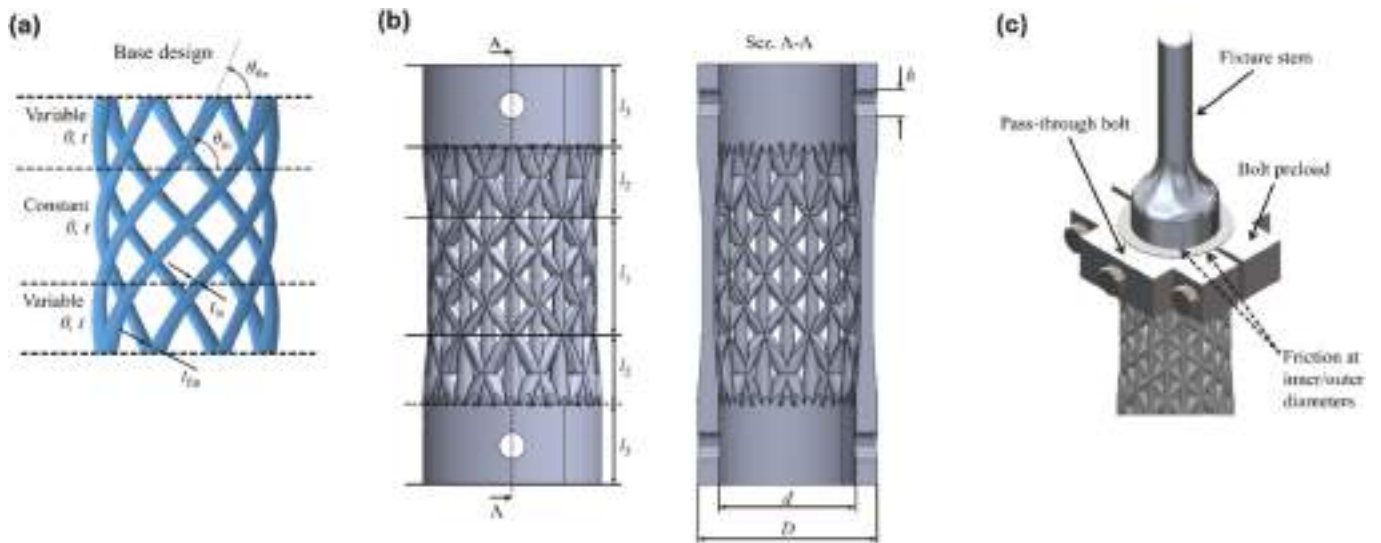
a) design of the lattice specimen gauge and transitional zones. b) lattice specimen geometry for fatigue testing. c) gripping system for connecting the lattice component to the testing machine.
